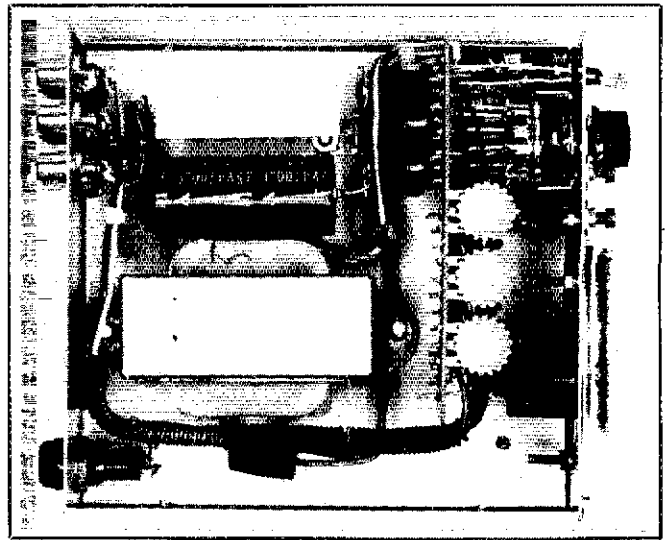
Top view of cabinet showing C1 and R14 mounted on tie strips next to the transformer.
